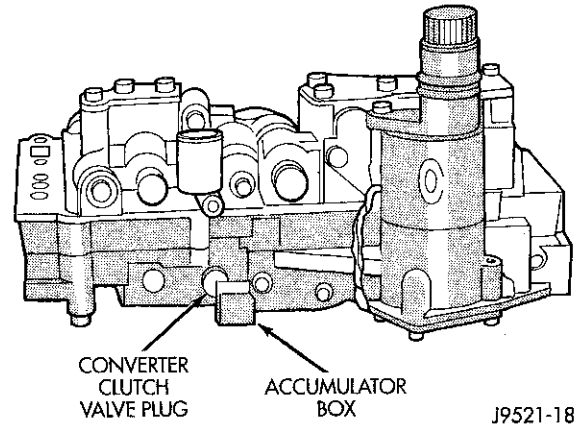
Seating 3-4 Accumulator On Lower Housing VALVE BODY FINAL
